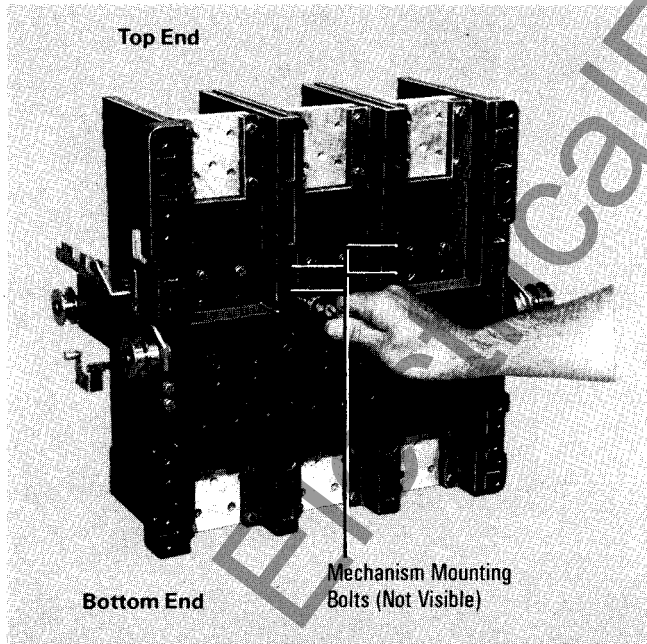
Removing Top Side Mechanism Mounting Bolts From Rear of 1600 Amp Breaker.
